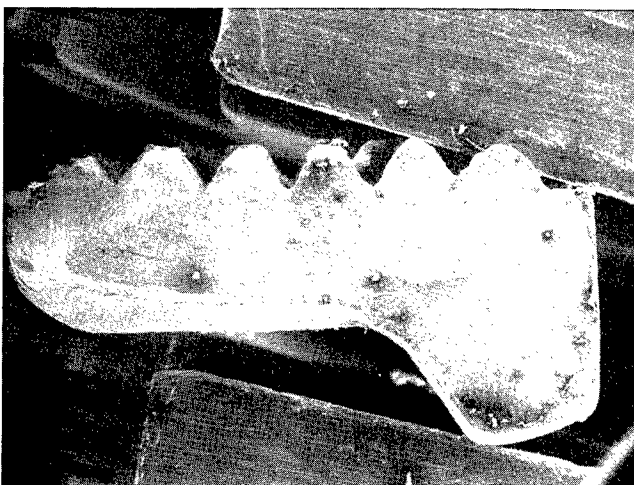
Mating fracture surface of Nut "A" Figure 19. Mag. 15x
